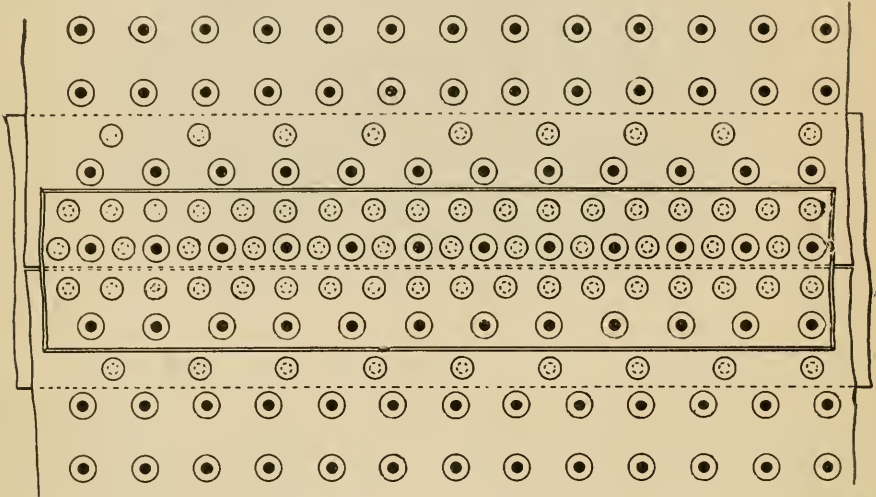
A TRIPLE-RIVETED JOINT, WITH STAY-BOLTS.
